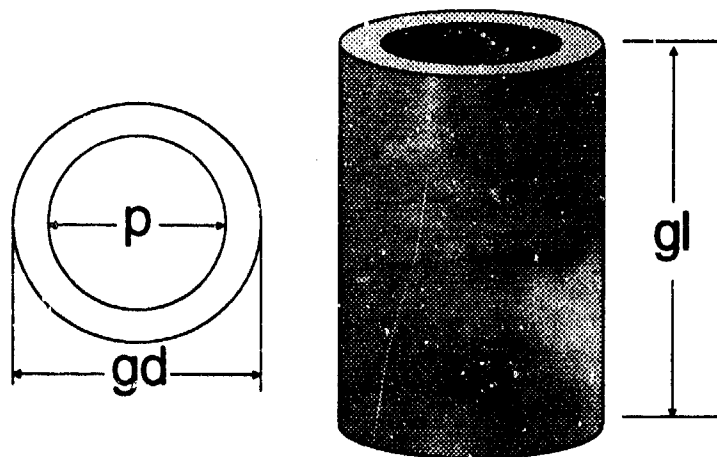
A. Single-Perforated Right Circular Cylindrical Grain.
